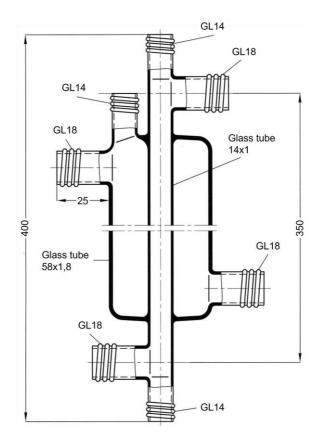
Technical drawing of the outer tube and the thermostatization jacket of the cold plasma reactor with dimensions in mm and size of the threads (indicated with the prefix GL).
